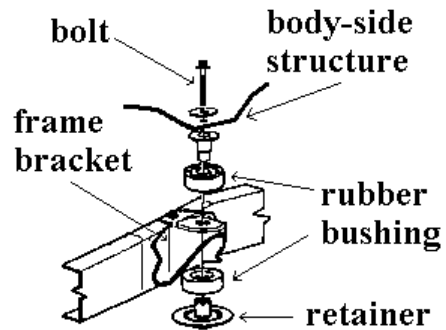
Type F Body Mount (= Fig. 2.36)
